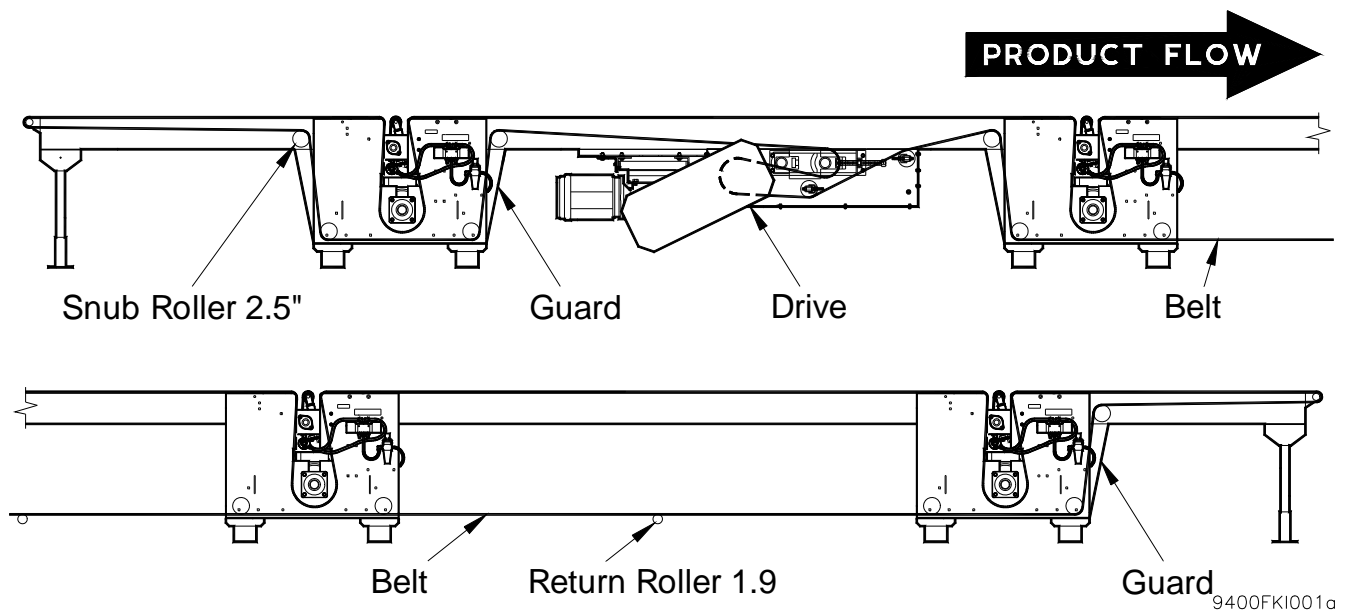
Typical Layout and Assembly Drawing(s) Showing Belt Tracking
